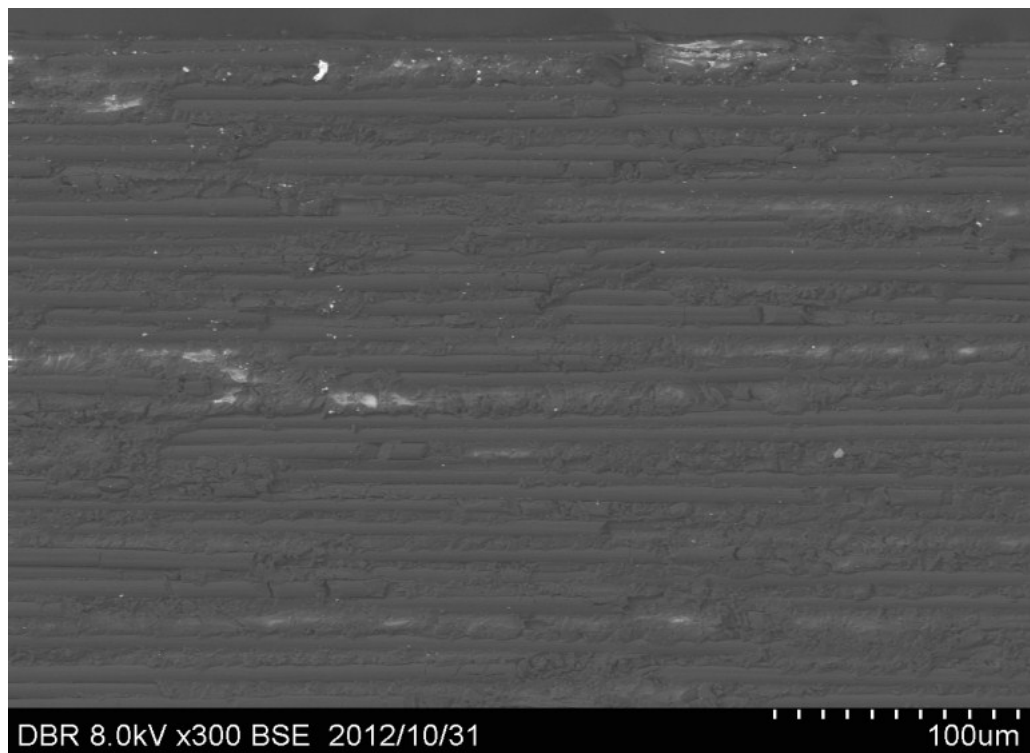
SEM image of finish surface of Material A 0° (Machined with Tool No. 2) (Up cut method)
